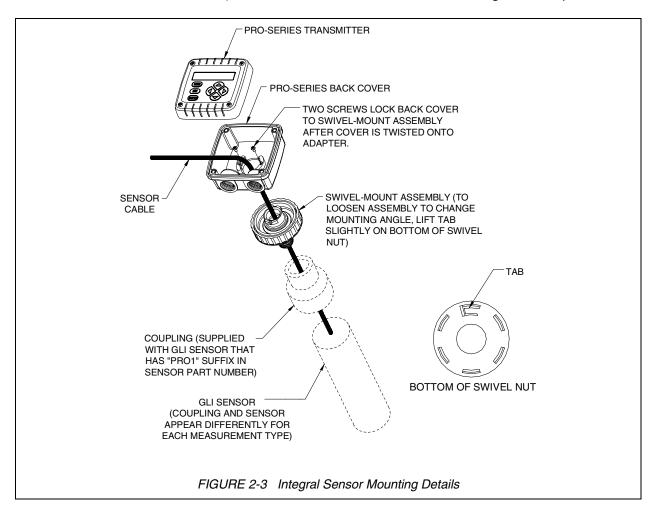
illustrates how to integrally mount the transmitter onto a sensor using the supplied GLI mounting hardware kit.
